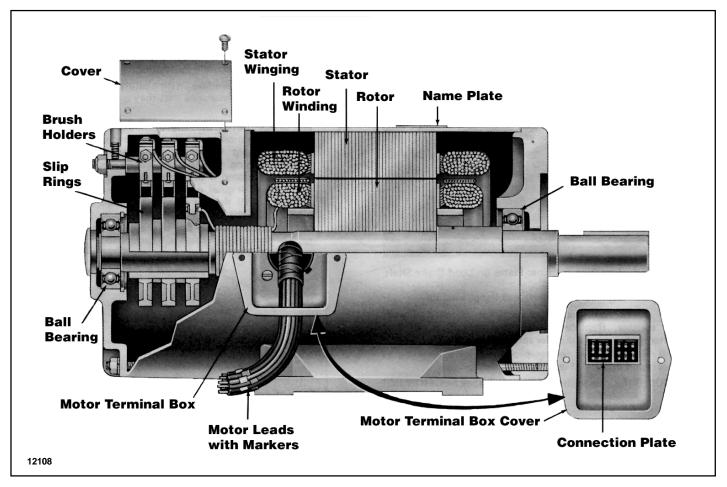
Cutaway View of Typical WOUND Rotor Motor
